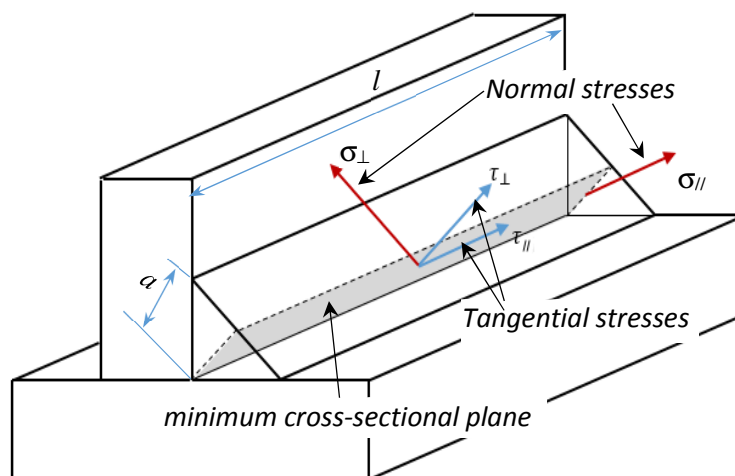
Stresses on the Throat Section of a Fillet Weld
